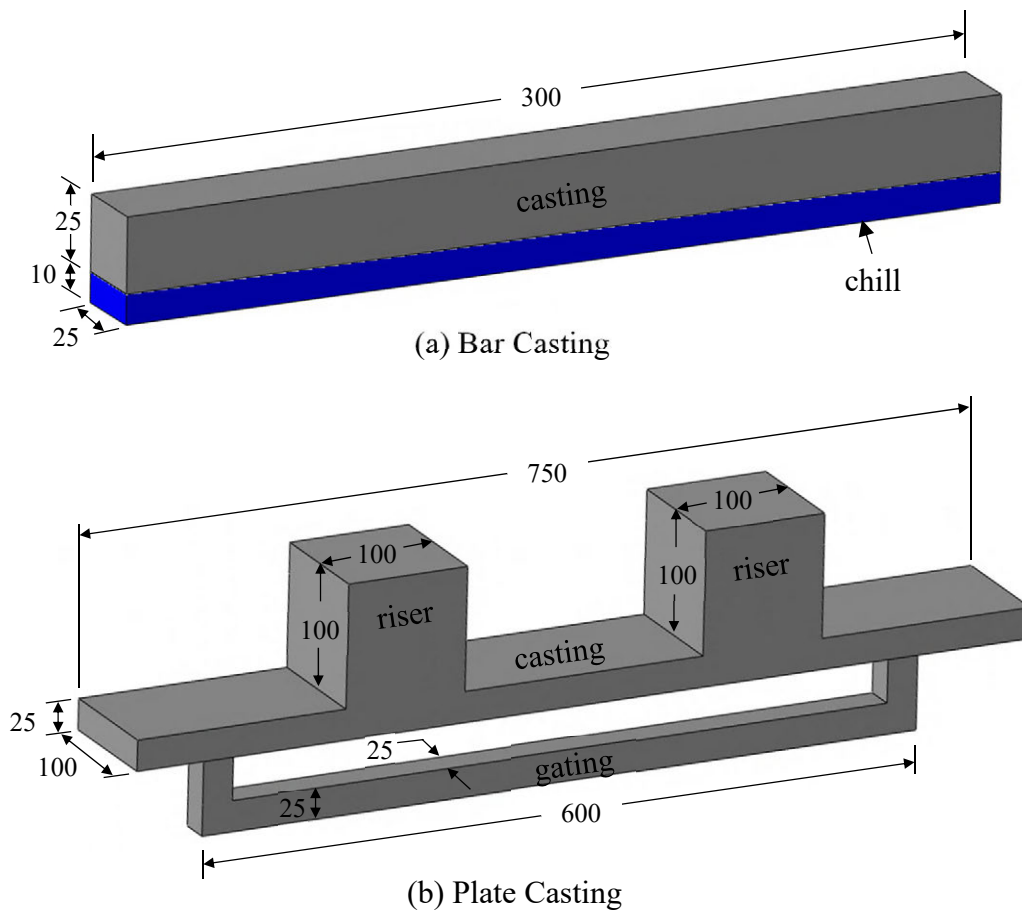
Geometries for the bar (a) and plate (b) castings. Dimensions in mm.
